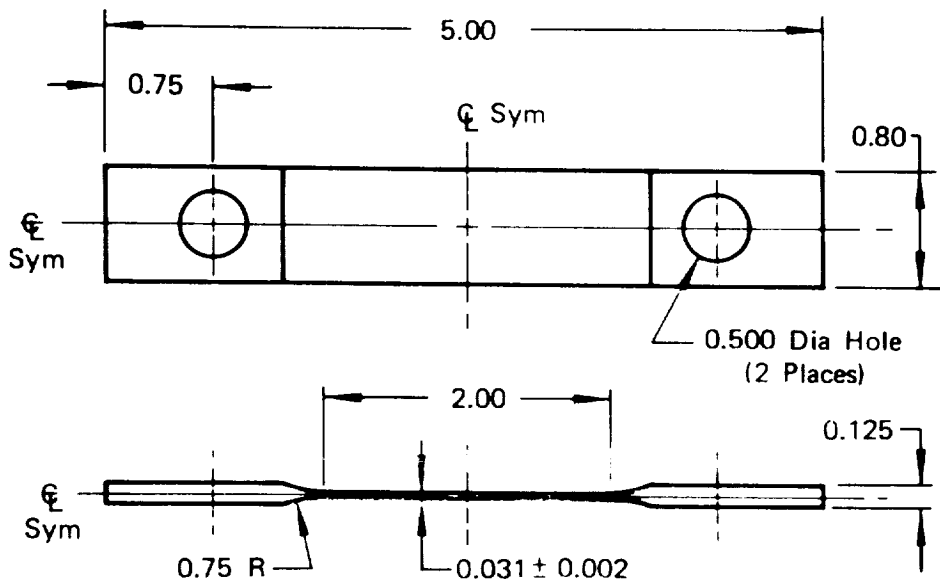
FORGING FRACTURE SPECIMEN (PART II)
